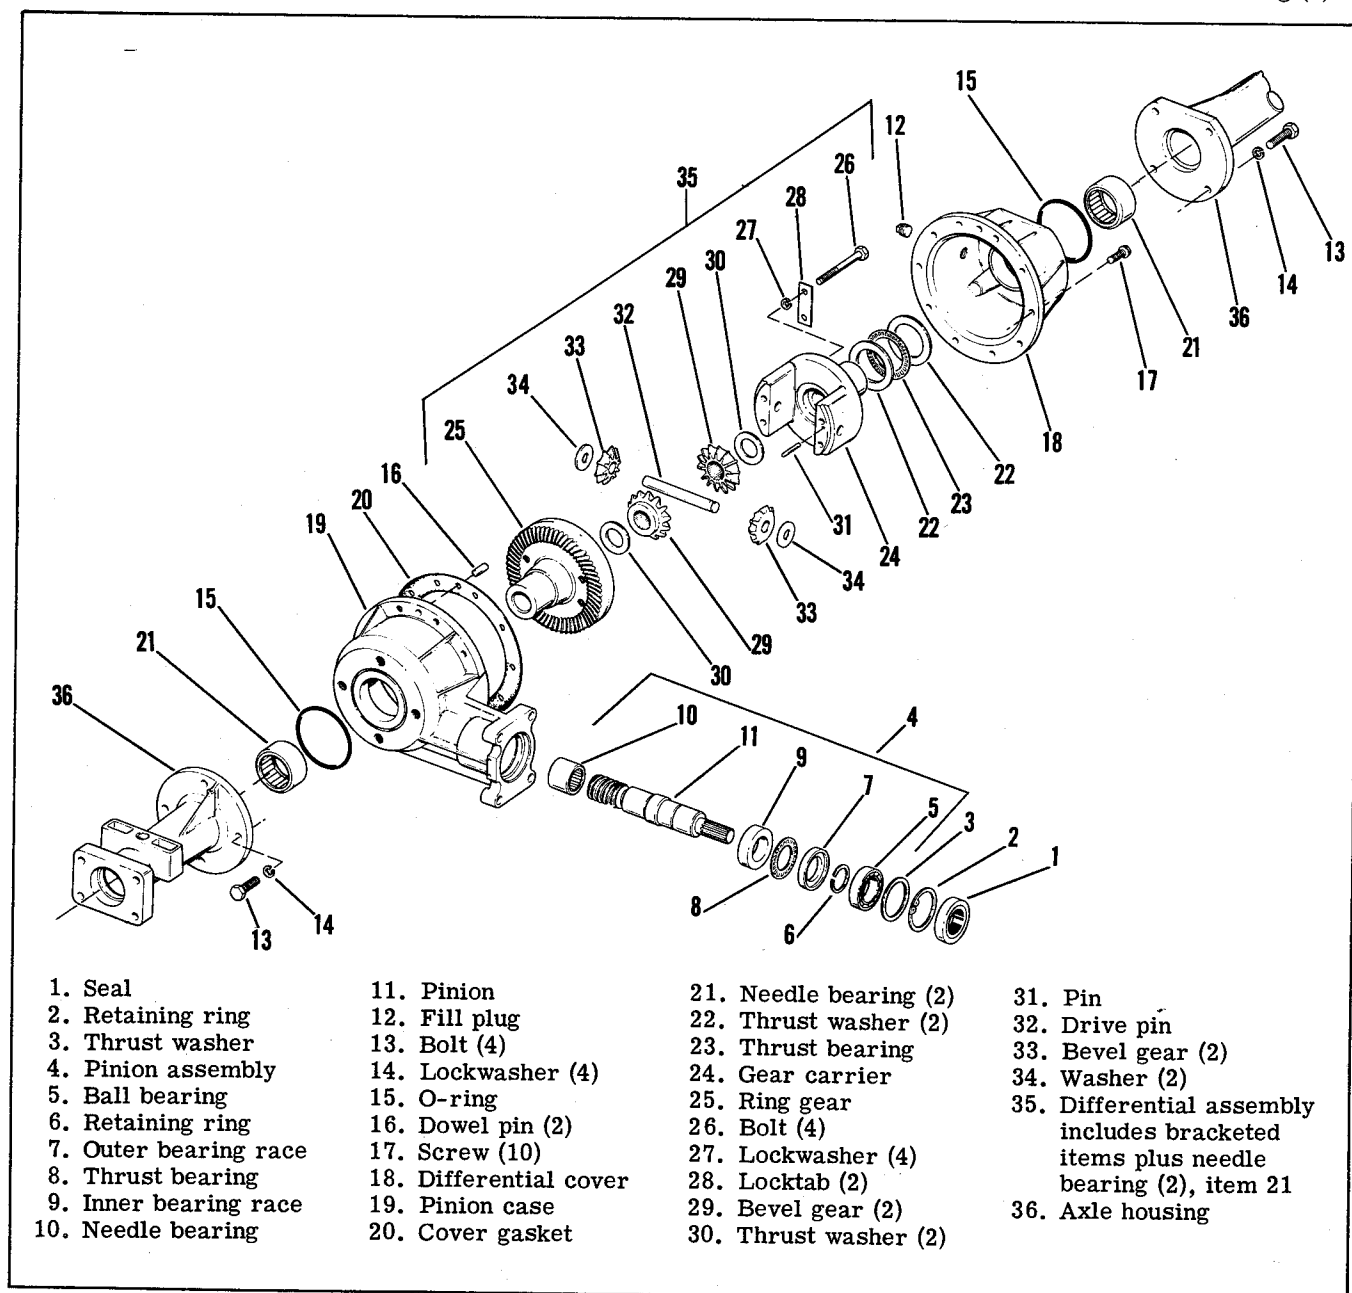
Differential Assembly - Late 1977 and Later - Exploded View
